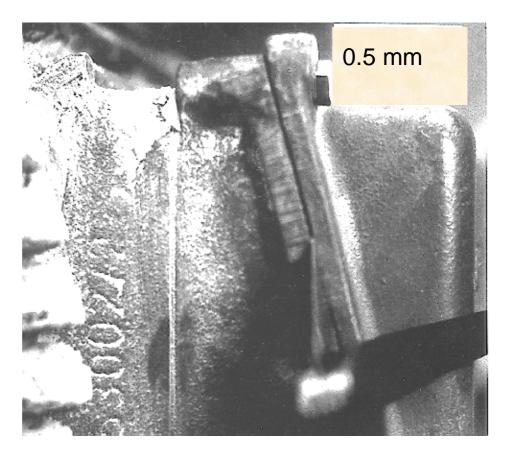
Adjustment of gap width (e.g. 0.5 mm) between the blank metal surfaces of the terminal housing and cover.
